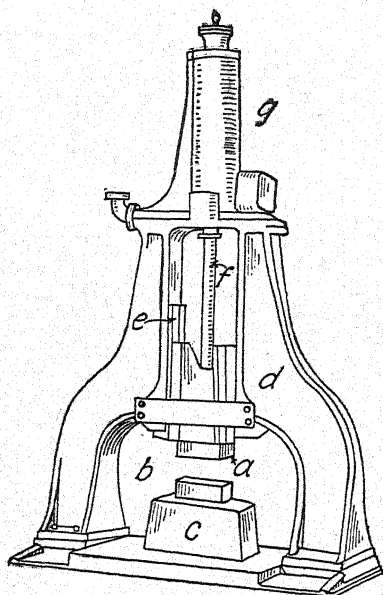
Power hammer. *a.* Hammer. *b.* Anvil. *c.* Anvil base. *d.* Frame. *e.* Guide. *f.* Piston. *g.* Cylinder. (Courtesy of *Nazel Engineering and Machine Works.*)
